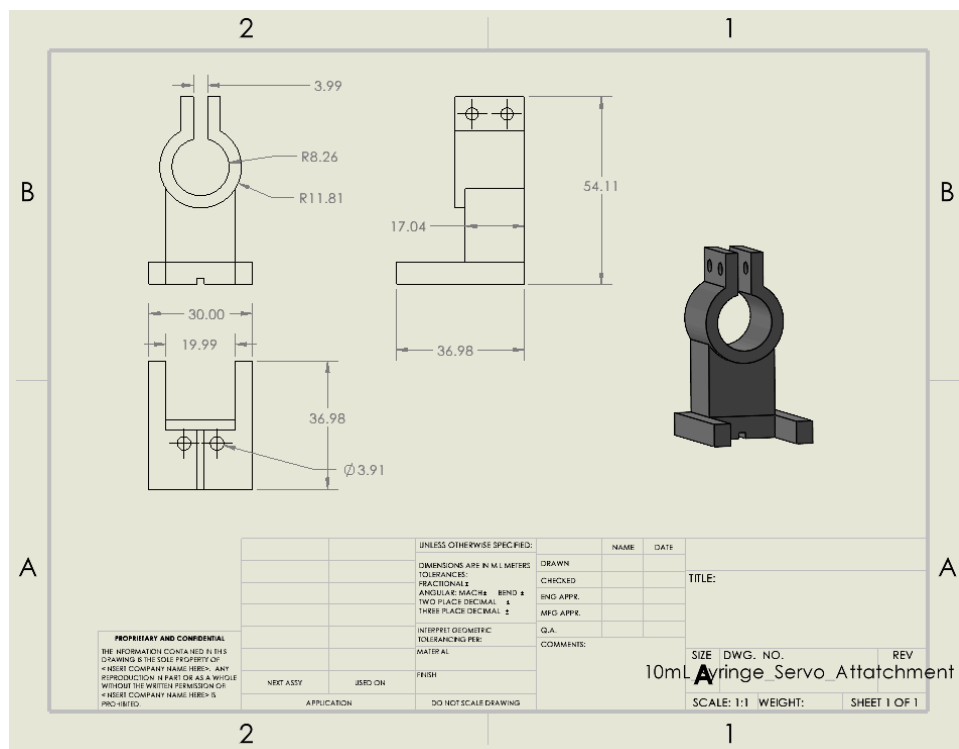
10mL Syringe Servo Attachment CAD Drawing
